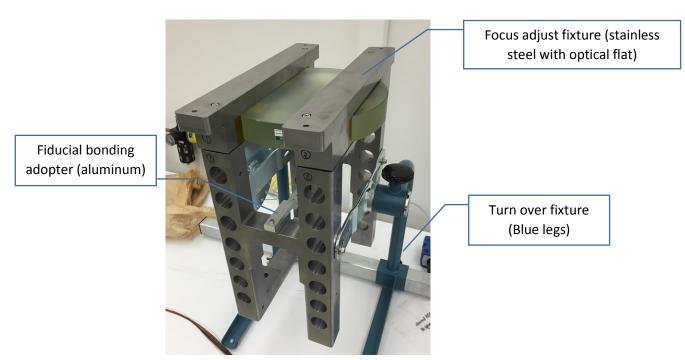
Focus adjust fixture with fiducial bonding adopter installed on turn over fixture
